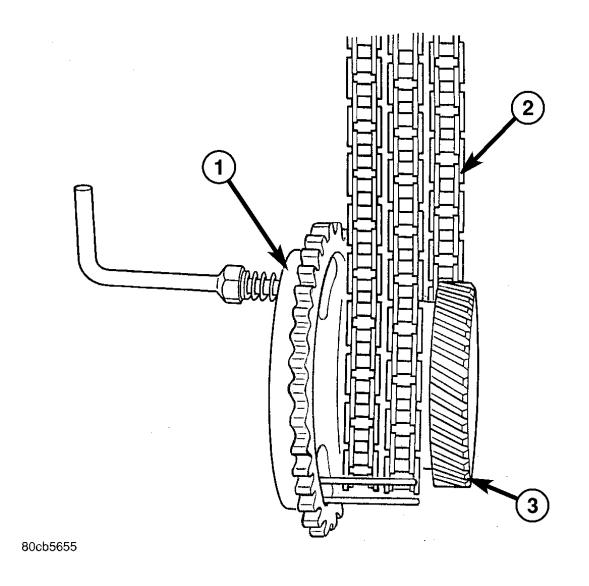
Special Tool 8429, Camshaft Chain & Crankshaft Timing Gear Courtesy of CHRYSLER LLC
